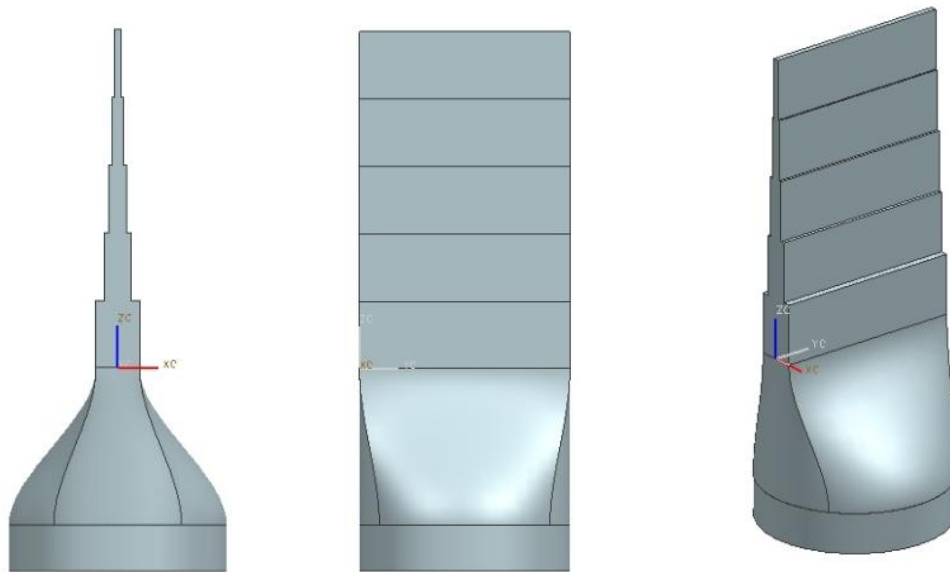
1. The 3-D model of 5-step casting with the round-shape gating system (A)XZ view; (B) YZ view; (C) isometric view
